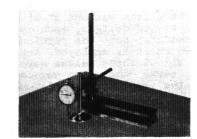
Method of Checking Valve Edge Thickness with Dial Indicator
